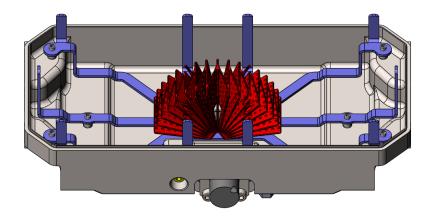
Tank Bottom Subassembly, showing PMD sponge (red) and vanes (blue)
